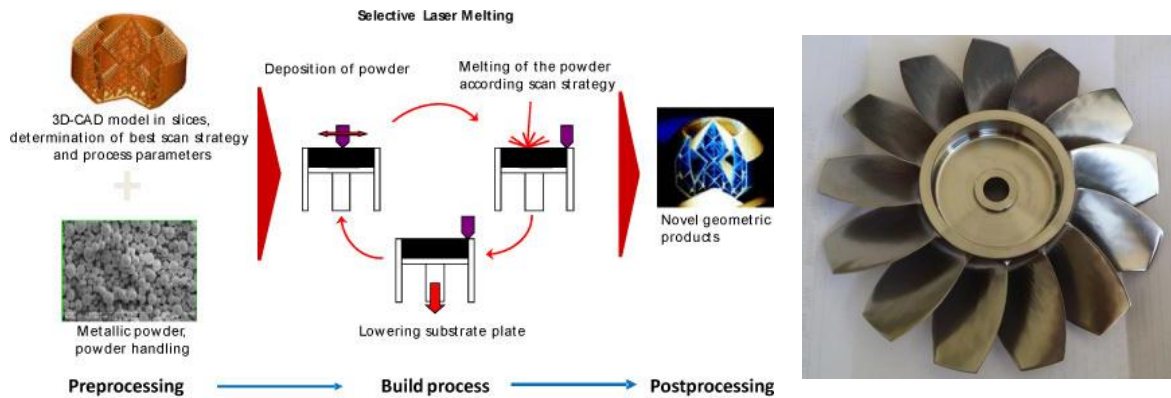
Selective Laser Melting process and image of fan wheel demonstrator
